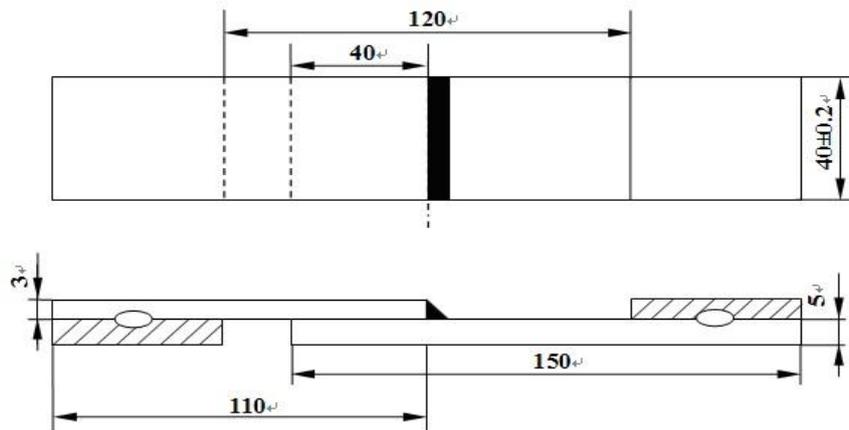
Fatigue specimen of lap fillet welded joint
